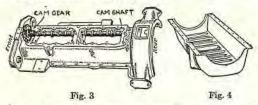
Upper part of crank case supporting cam shaft and bearings.
